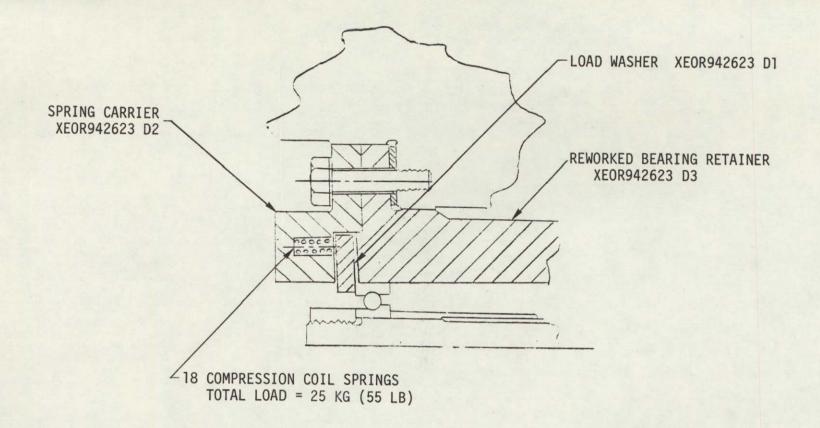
Modified Tester Bearing Preload Spring Arrangement
